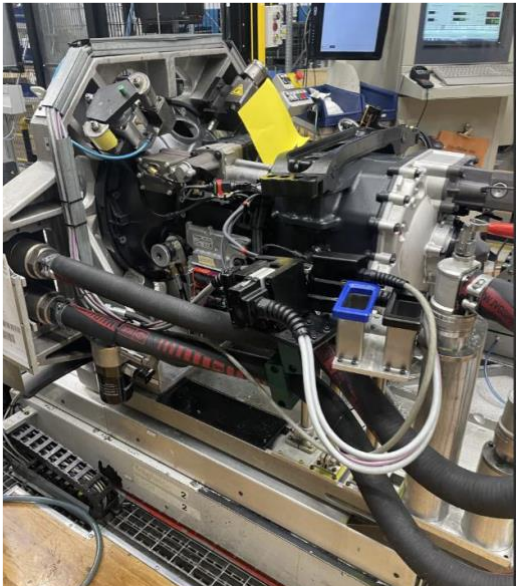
The gearbox is placed on the test rig pallet for the test run. (courtesy: Scania).
